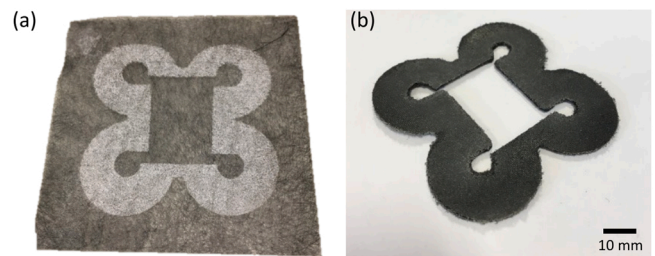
Composite component made using the CFAM approach (a) printed layer before compression and bead blasting (b) final part with 24 layers.
